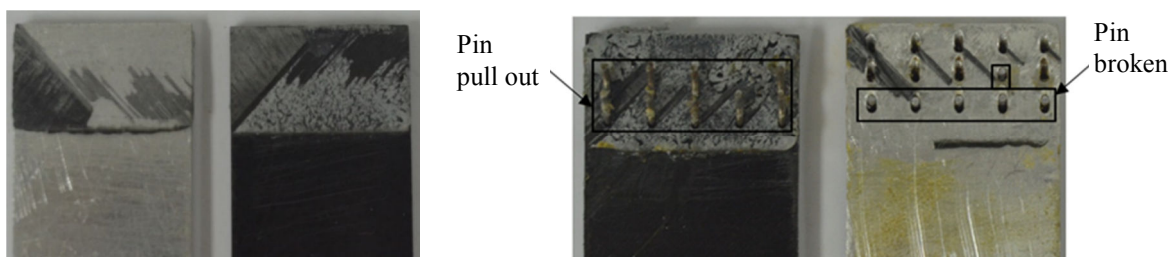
Failure modes of traditional adhesive joint and adhesive-multi pin joint
